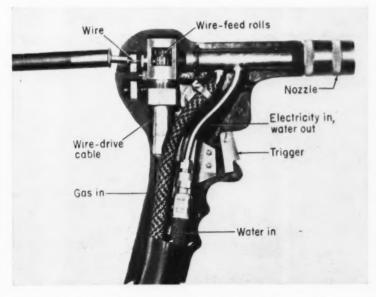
G-E welding gun containing knurled feed rolls for feeding electrode wire of aluminum, steel alloys, and other metals
